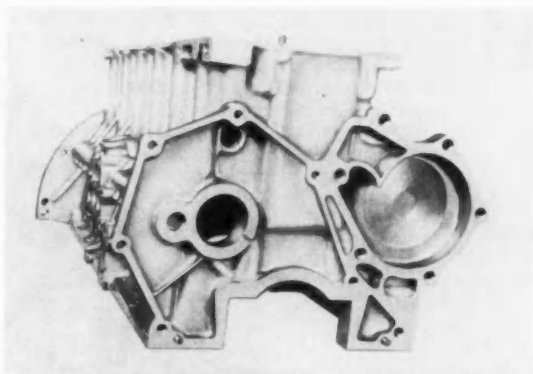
Front face view of Chrysler die-cast aluminum cylinder block.
